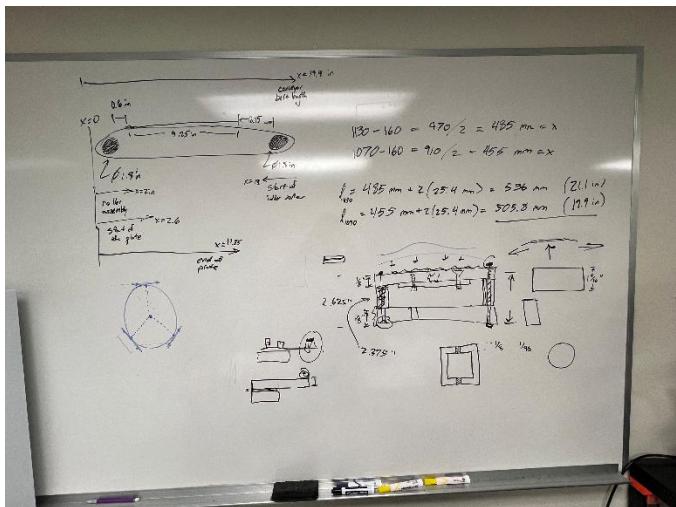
Figure C. Whiteboard from the early design phase depicting math surrounding the length of the conveyor belt assembly (upper half) and a more finalized version of the cross-sectional arrangement of the assembly (lower half).
